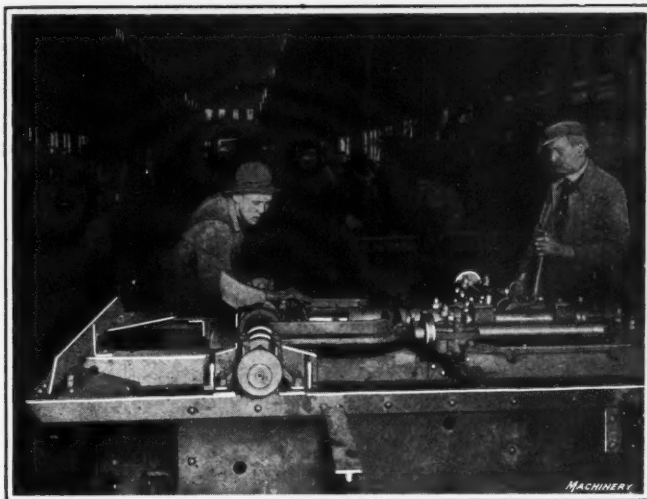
Babbitting Jig used for Bearings of 75-horsepower Tractors
